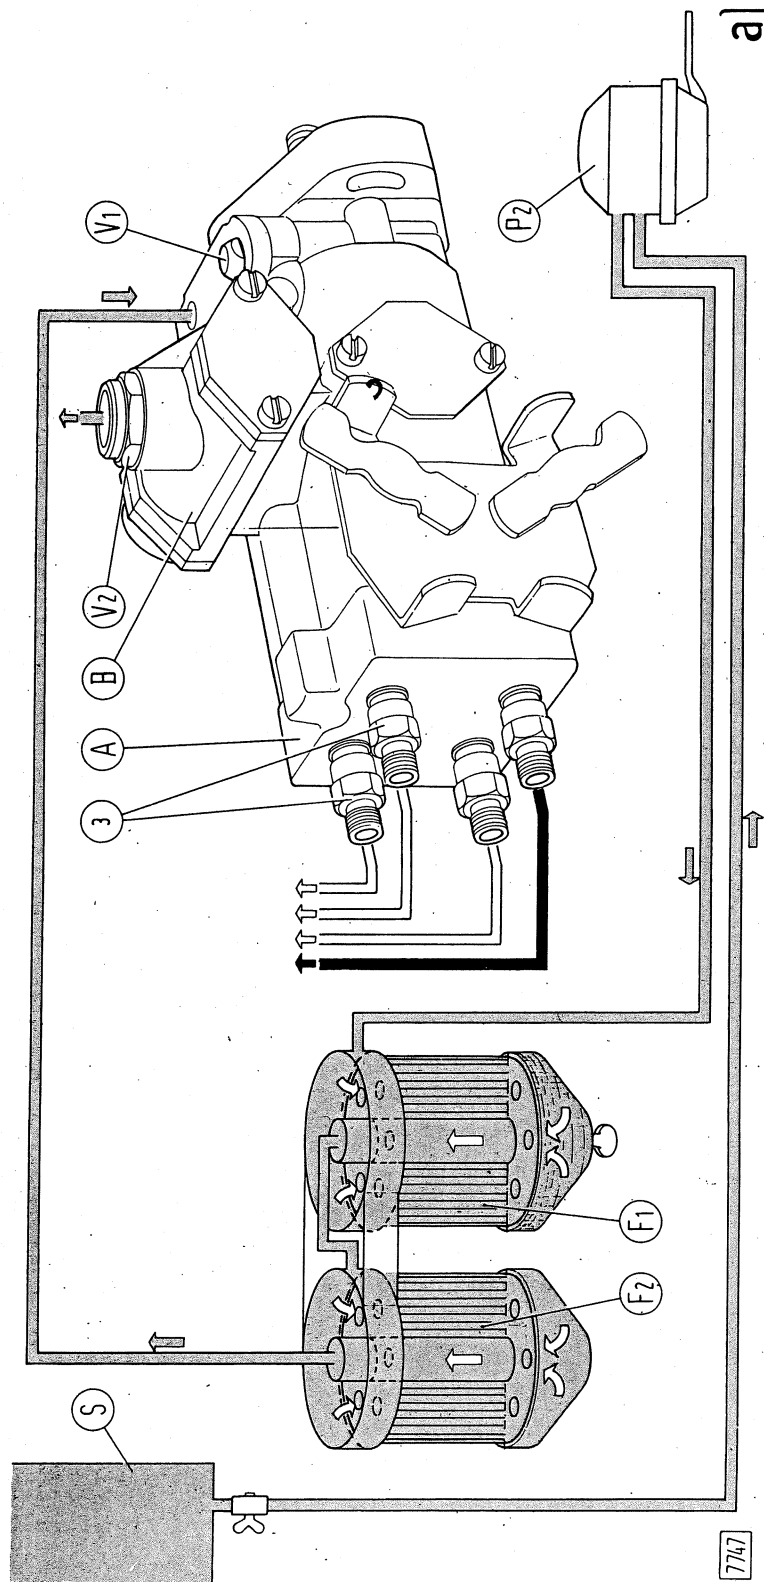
View of the fuel general circuit (for 3-cylinder engine) with injection pump BOSCH type EPVA-CL
